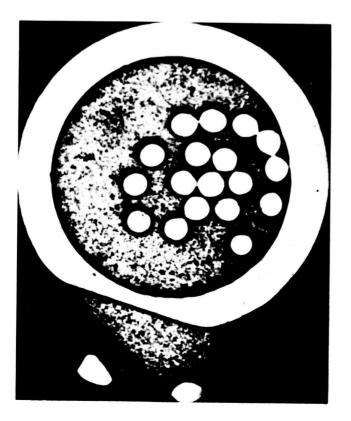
Solder joint 1.1.1.89 stranded conductor to cinch connector cup; sterilized; 60x magnification; potassium dichromate etch (02345).
